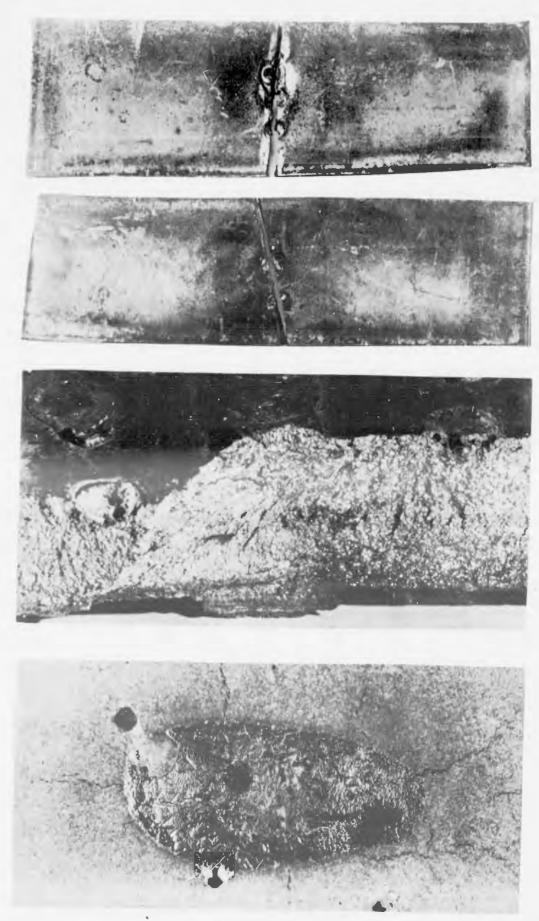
Top - "A" and "B" Drop Weight Test Pieces with Arc Strike Defects (See Fig. 7) Center - Arc Strike Origin of Fracture in 20" x 20" Weldment.
